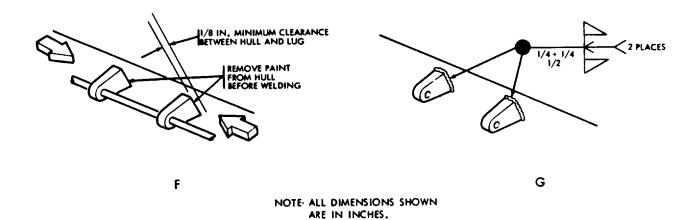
Welding mounting lugs in place (sheet 2 of 2).
